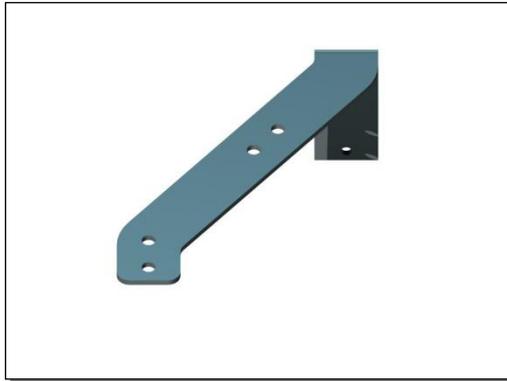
Heimdall Kerbside Mounting Bracket (667/1/31910/000)
